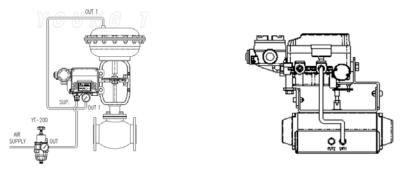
Singe acting linear (left) and rotary (right) type actuator
